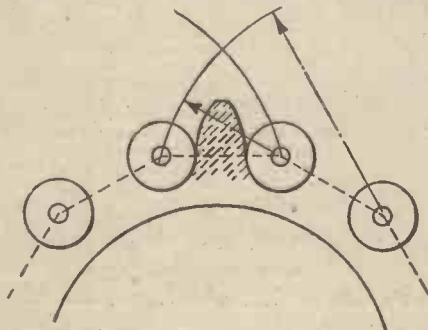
By drawing the involute tooth shown, the maximum height that the addendum can be given may be found.
